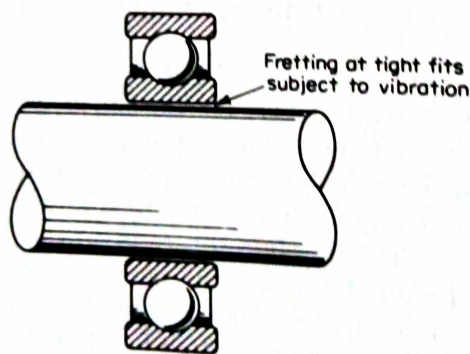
(a) Fretting corrosion of a tight fit.
